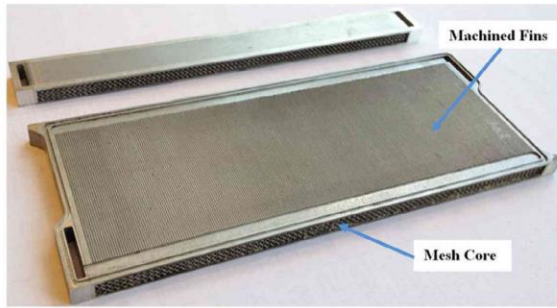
Wire mesh heat exchanger with machined external fins on a mesh core.
